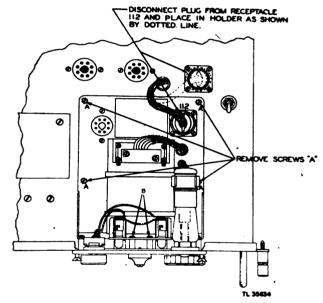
Removal of Remote Indicator I-227-A from Indicator I-221-A.
